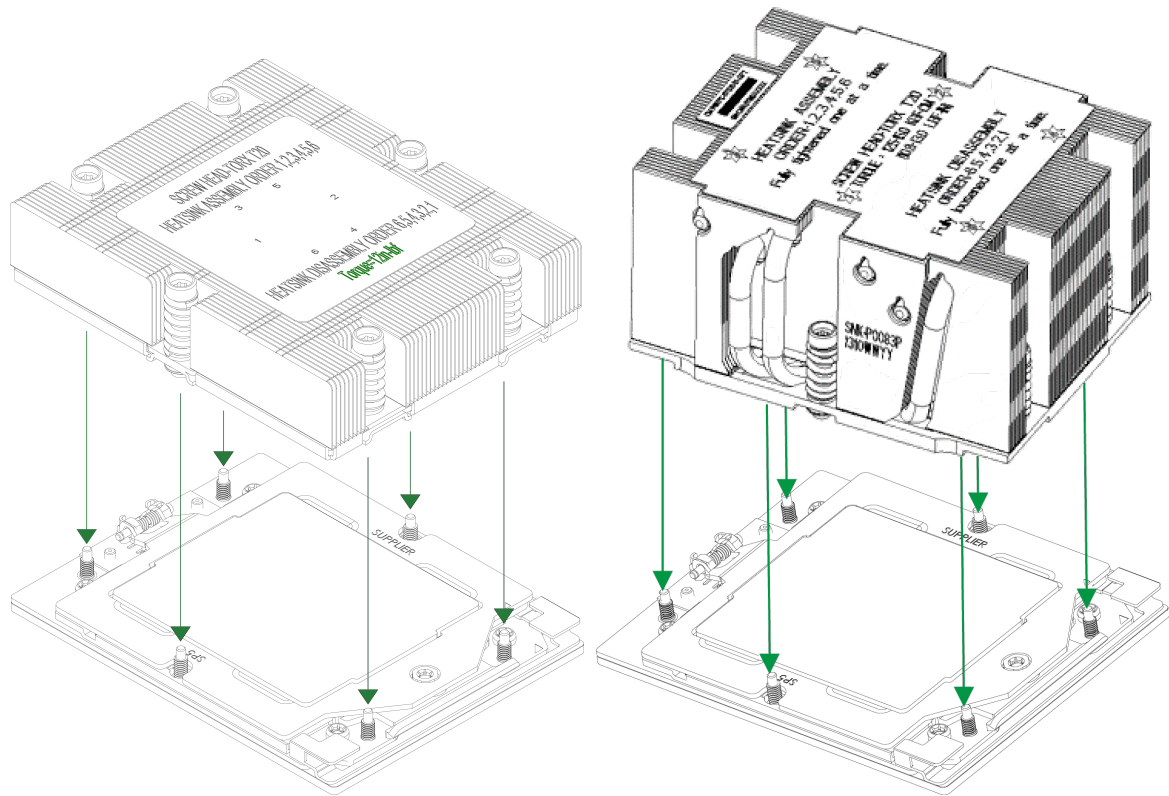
Placing the Heatsink (1U left, 2U right)
